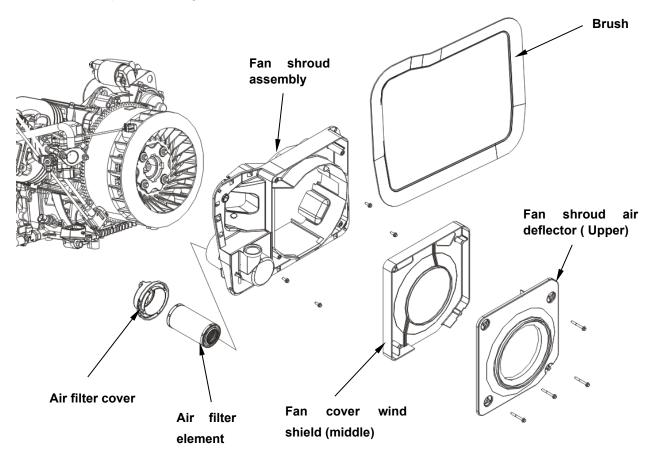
FAN HOUSING AND FILTER ELEMENT
